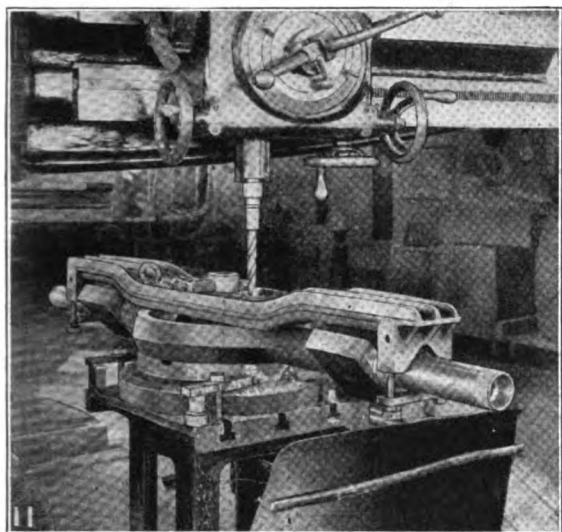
DRILLING AND TAPPING BANJO HOLES.
